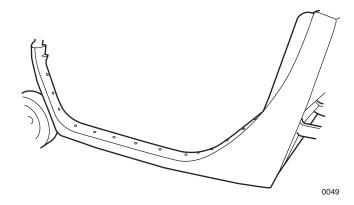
Body Side Panel - LS - Typical (4-passenger shown)
